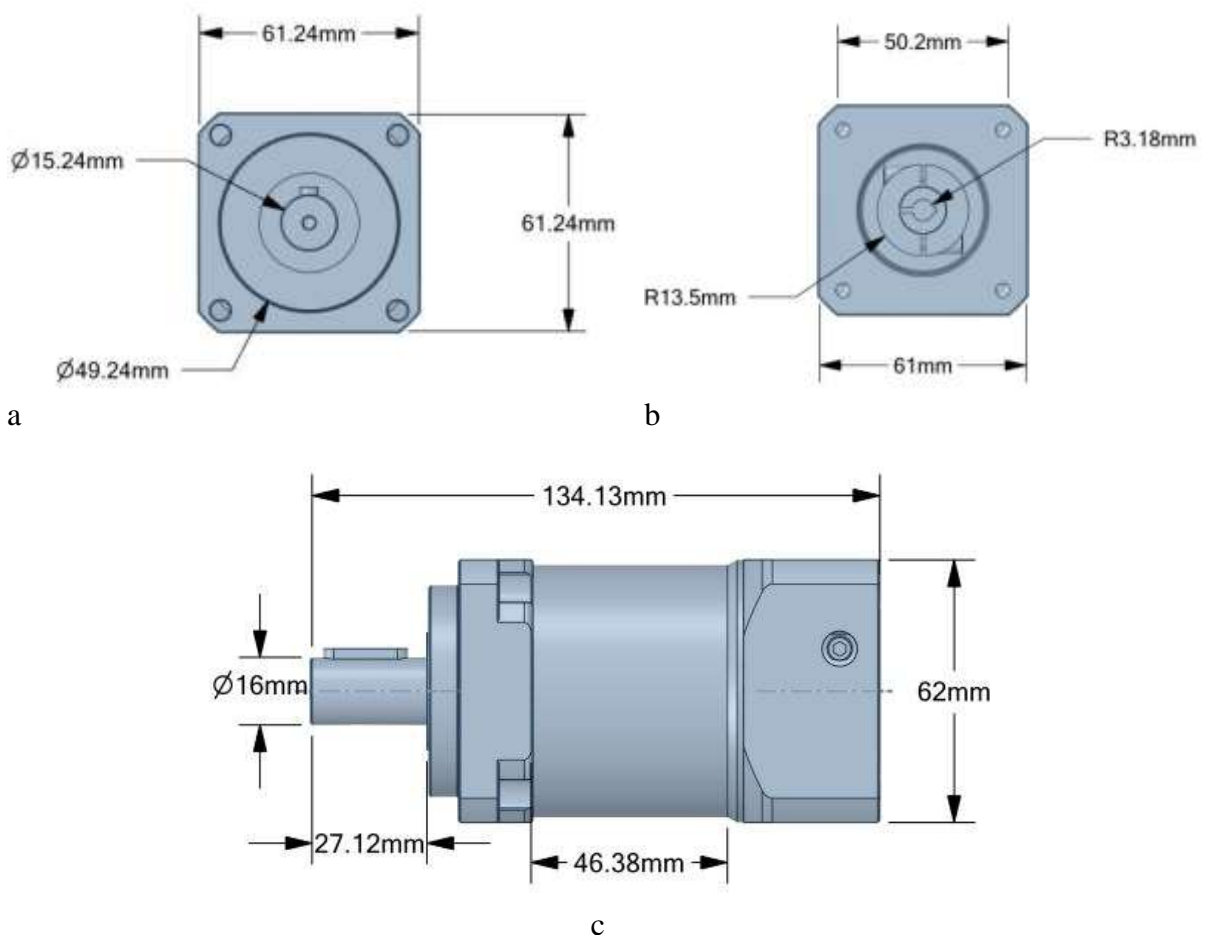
Dimension Details of the gearbox, a) front, b) back, c) side views
